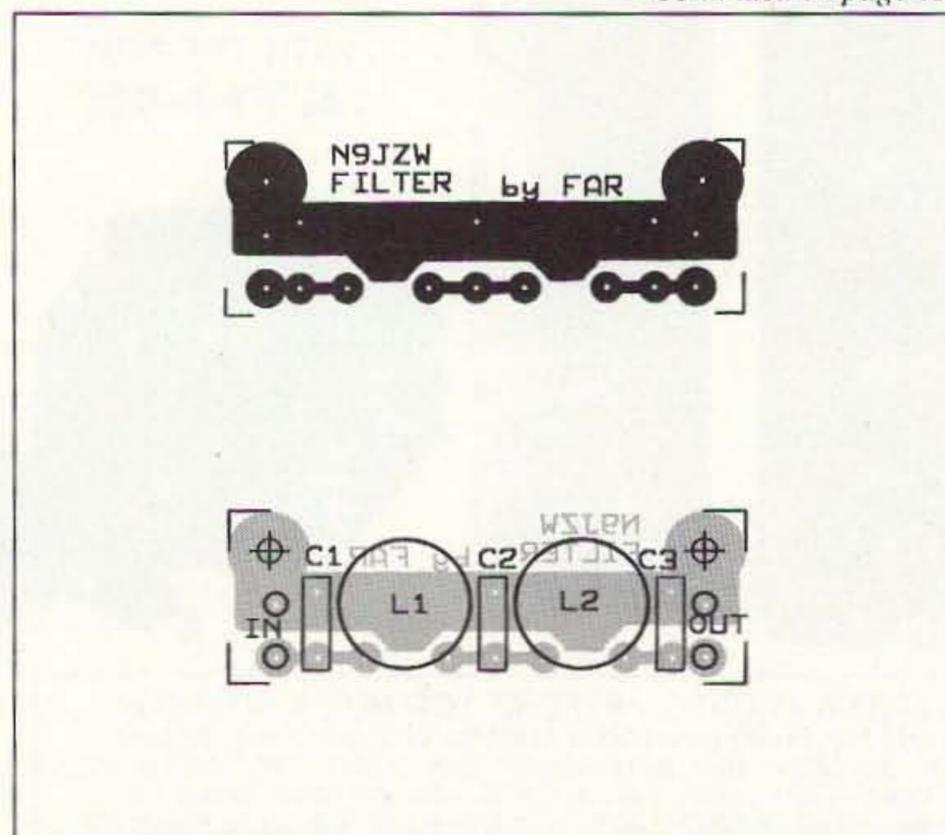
(a). PC board foil pattern of the output filter board. (b). Parts placement.
